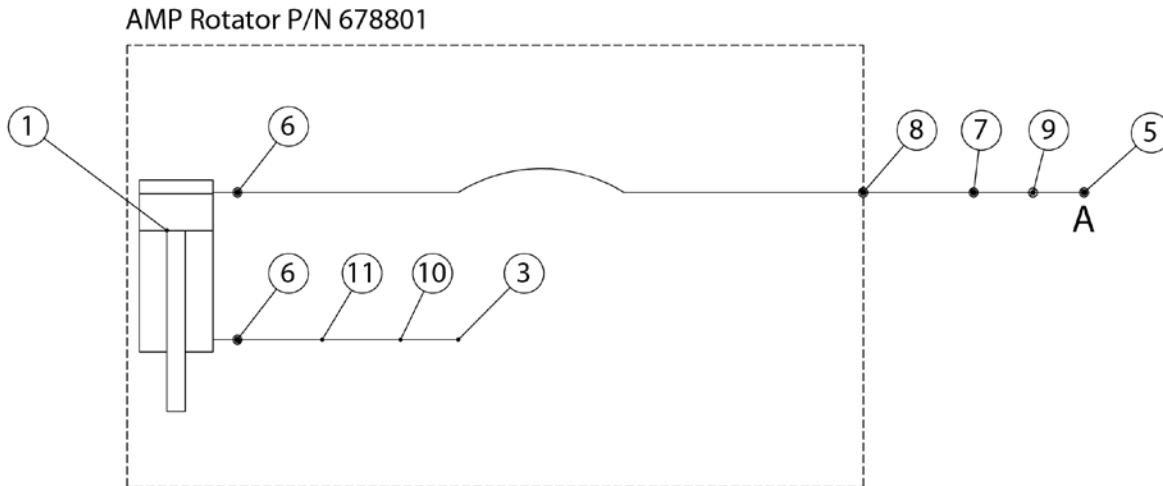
678801-H Hydraulic Assembly Single Rotator (single acting)
